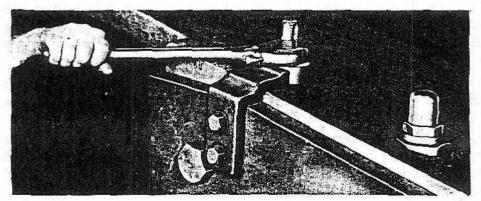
Adjusting Tension of Brake Gripping Spring
